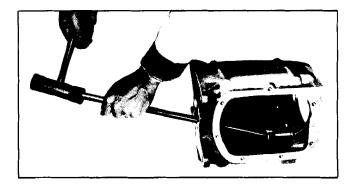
A-22 Removing Reverse Idler Gear Shaft
